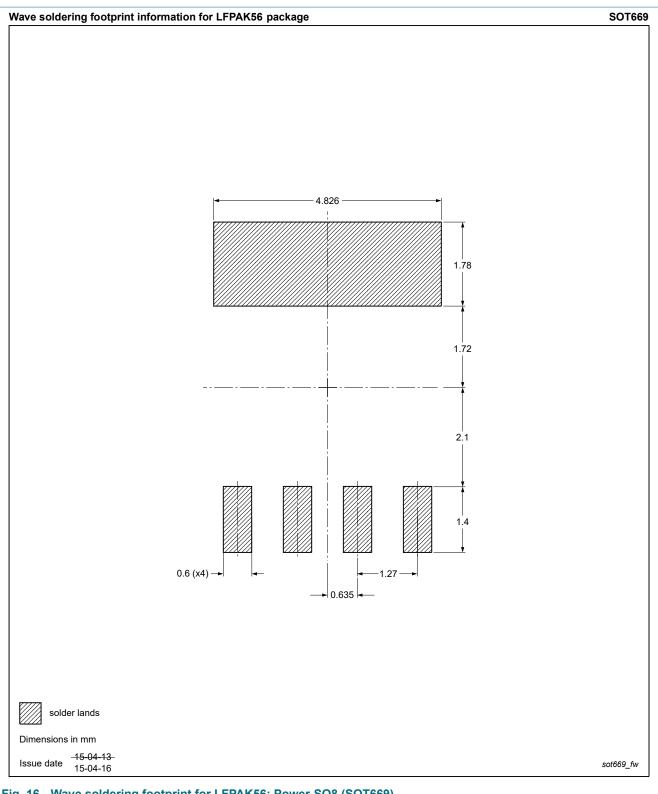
Wave soldering footprint for LFPAK56; Power-SO8 (SOT669)
